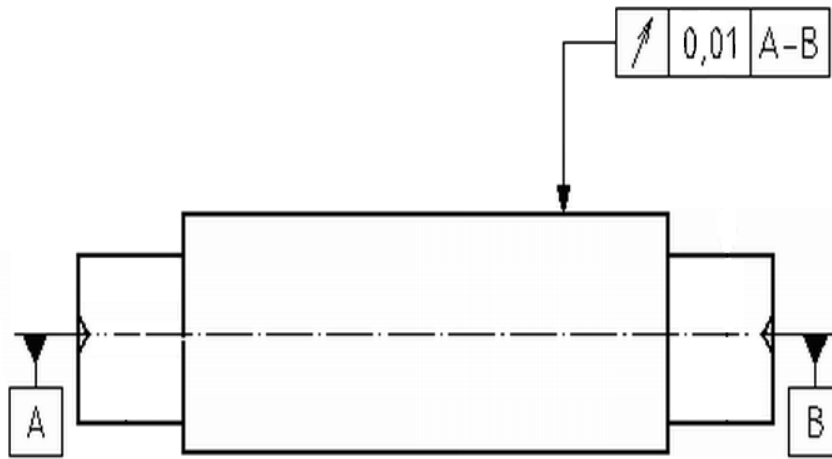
Specification Runout Tolerance / workpiece acc. ISO 1101
